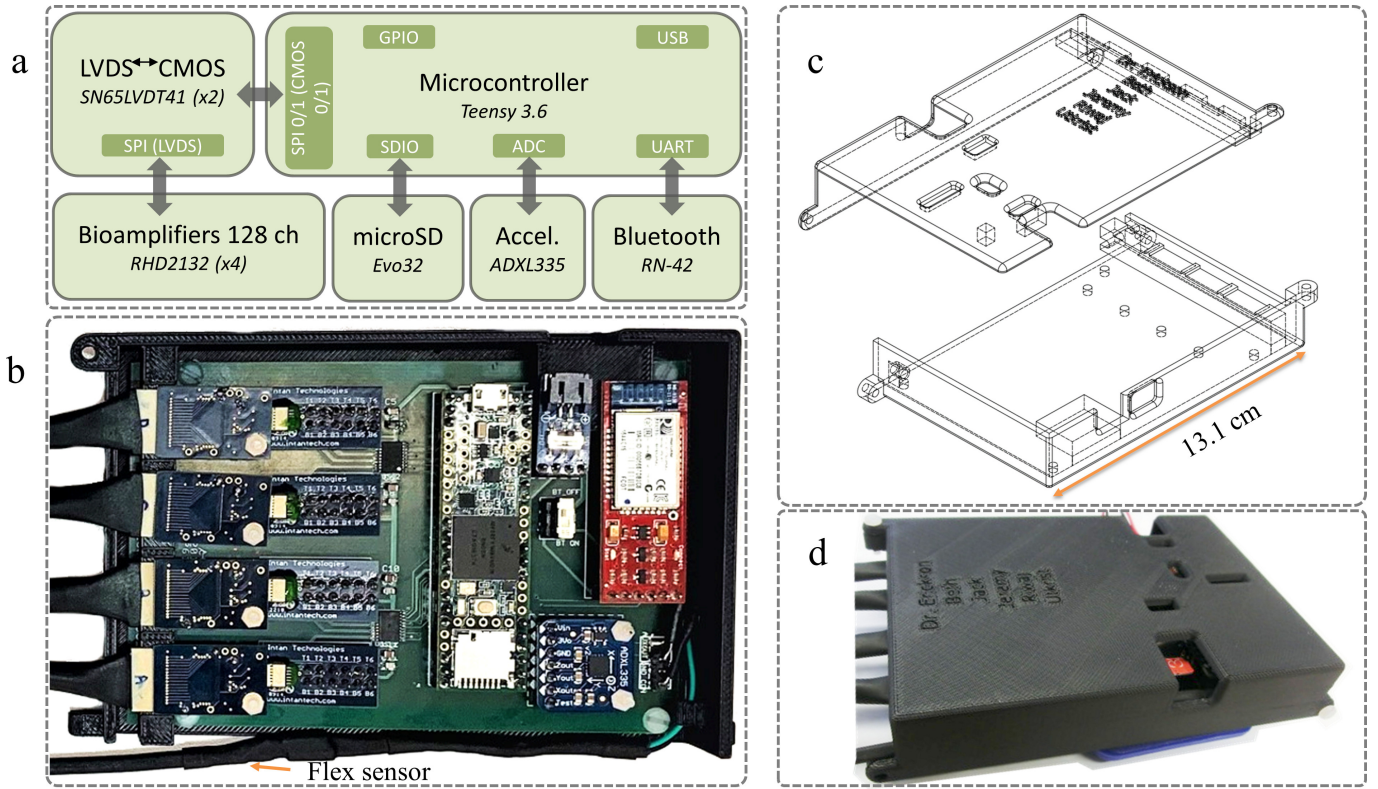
System overview of the Intsy 128 device. a: Electronics design block diagram; b: Fully assembled PCB mounted in base of enclosure; c: 3-D CAD rendering of enclosure assembly showing base and lid. d: Fully assembled Intsy-128 module.
